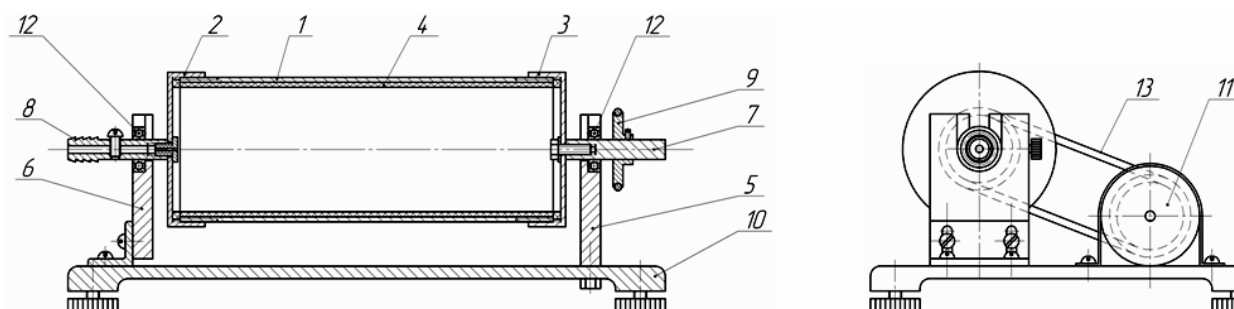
Installation for centrifugal molding of composite films of polymer hydrogels: 1 – mold; 2, 3 – end caps; 4 – polymeric tube; 5, 6 – supports; 7 – transmission shaft; 8 – hollow sleeve; 9 – sheave; 10 – foundation; 11 – electric motor; 12 – bearing part; 13 – driving belt
